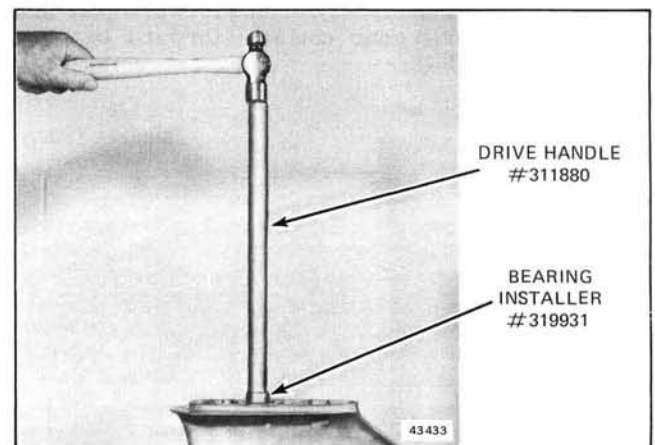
Installing Driveshaft Bearing and Sleeve
